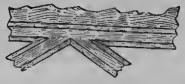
Section of Face Moulding, Ribs, and Back of Frame.
